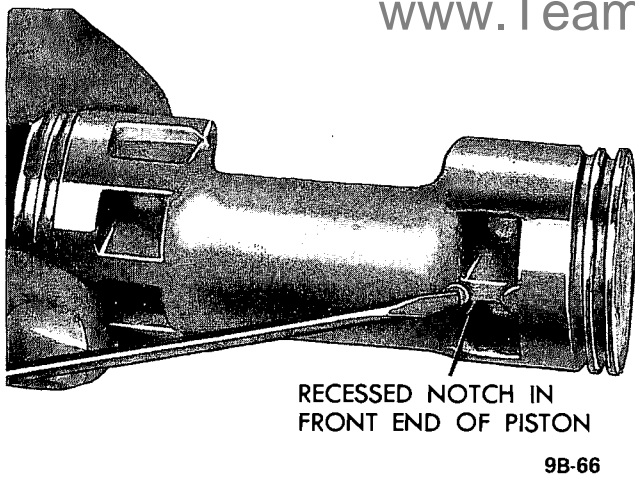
B-92 Piston Identification - 6 Cylinder Compressor
